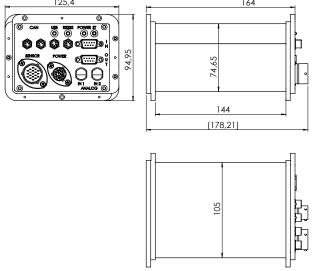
Dimensions Correvit® L-350 Aqua electronics
